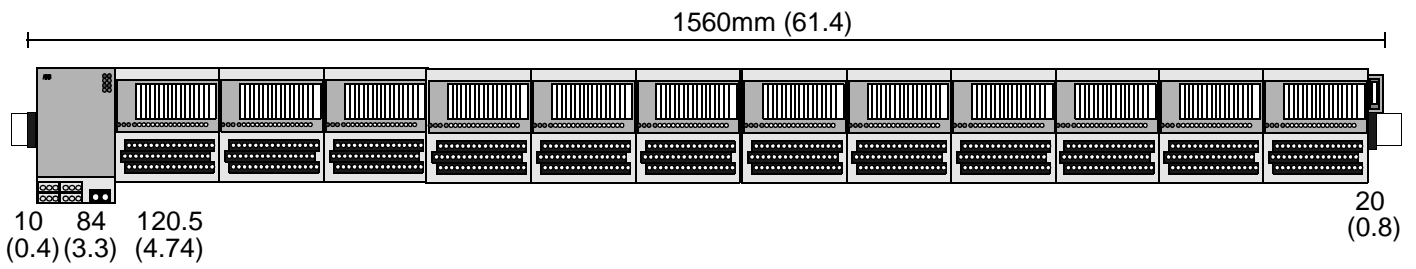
Horizontal Mounting of S800 I/O MTUs (Extended)
